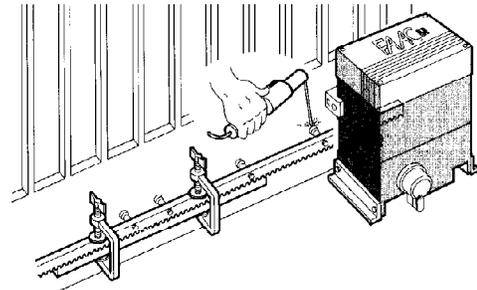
Use an upside down piece of rack to align the rack before welding
